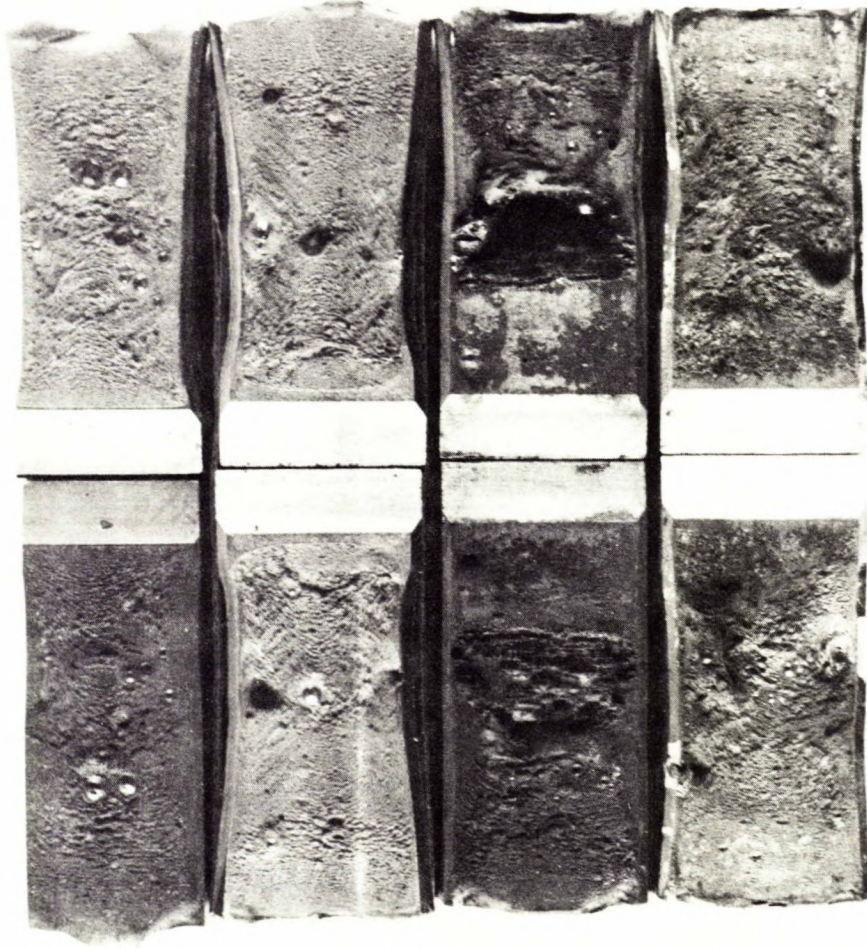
Fracture faces of T-1 weld metal specimens from 25 mm (1 in.) plate; from left to right, specimens 11, 12, 13 and 14. (Approx X3)
